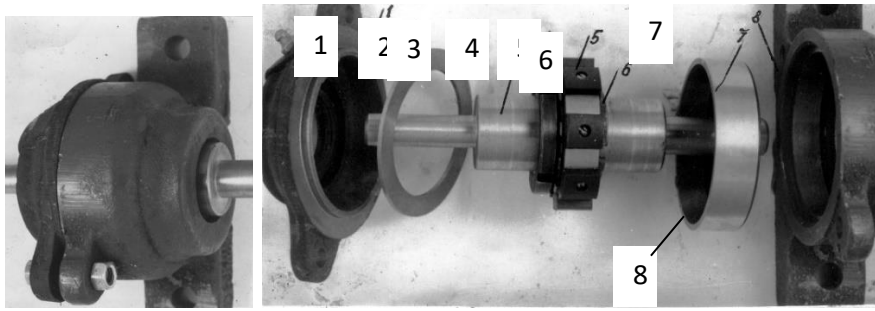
General view and elements of the laboratory sliding bearing in the form of an inverted friction pair based on a rolling bearing 11237K.
